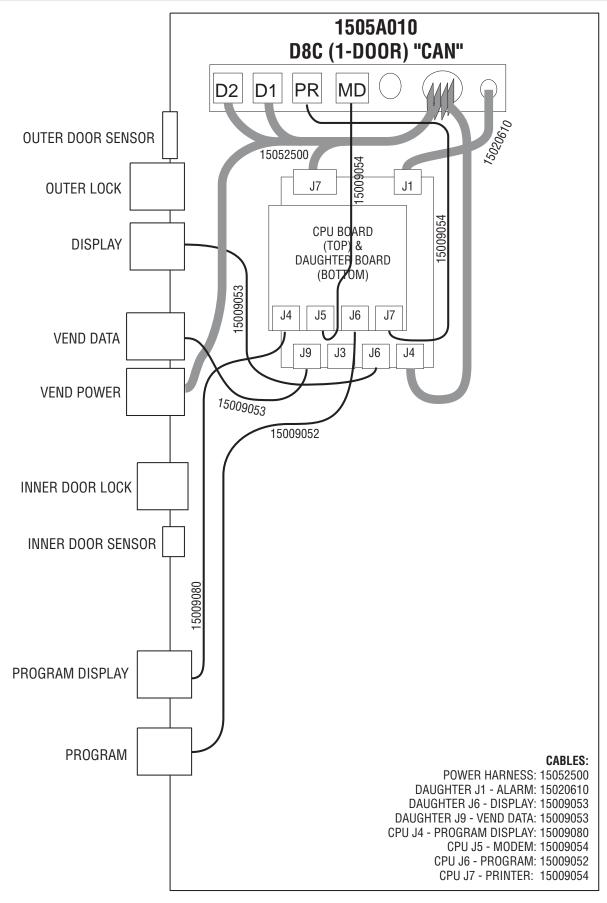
D8C (Single Door) Inner Electronics Assembly
